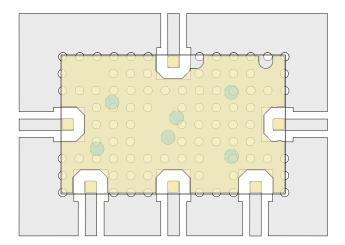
ACFM-7101 Outline and Bottom Metal Superposed on PCB Land Print.
